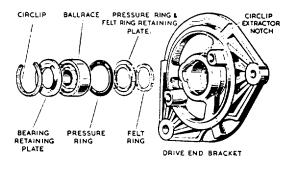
Drive End Bracket with Circlip Retained Bearing.
